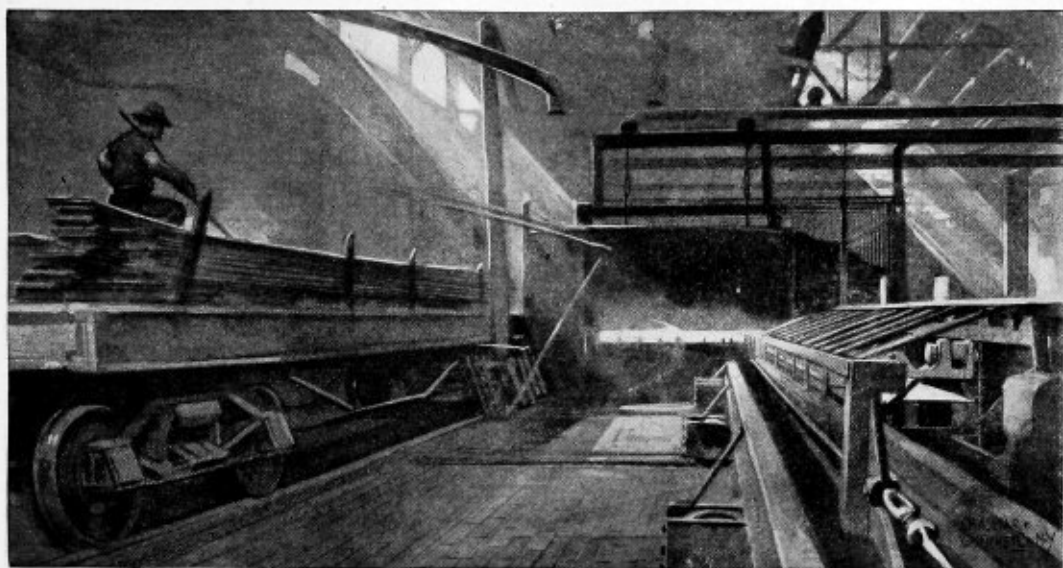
CHARGING PLATE INTO BUTT-WELD FURNACE.
